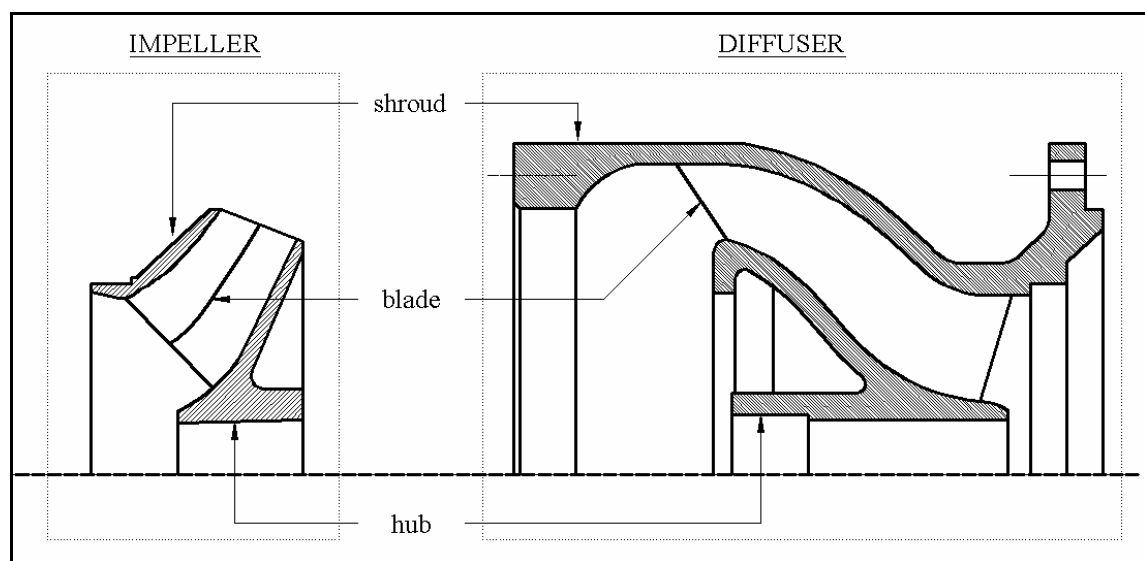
The impeller and diffuser of a centrifugal pump.
